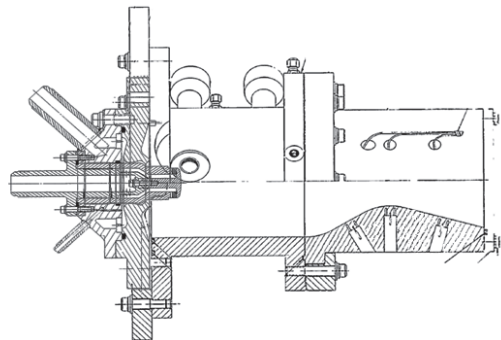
TRW 3K Engine(Pintle injector & Chamber).
